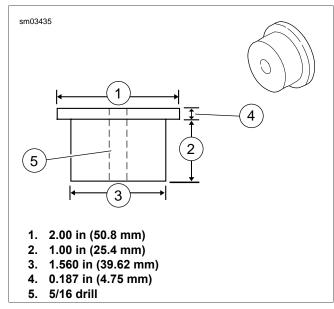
Pinion Shaft Outer Race Installation Tool
